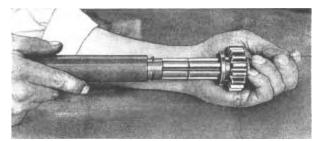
Installing Thrust Washer Retainer on Countershaft—J-781 Countershaft Retainer Ring Replacer
